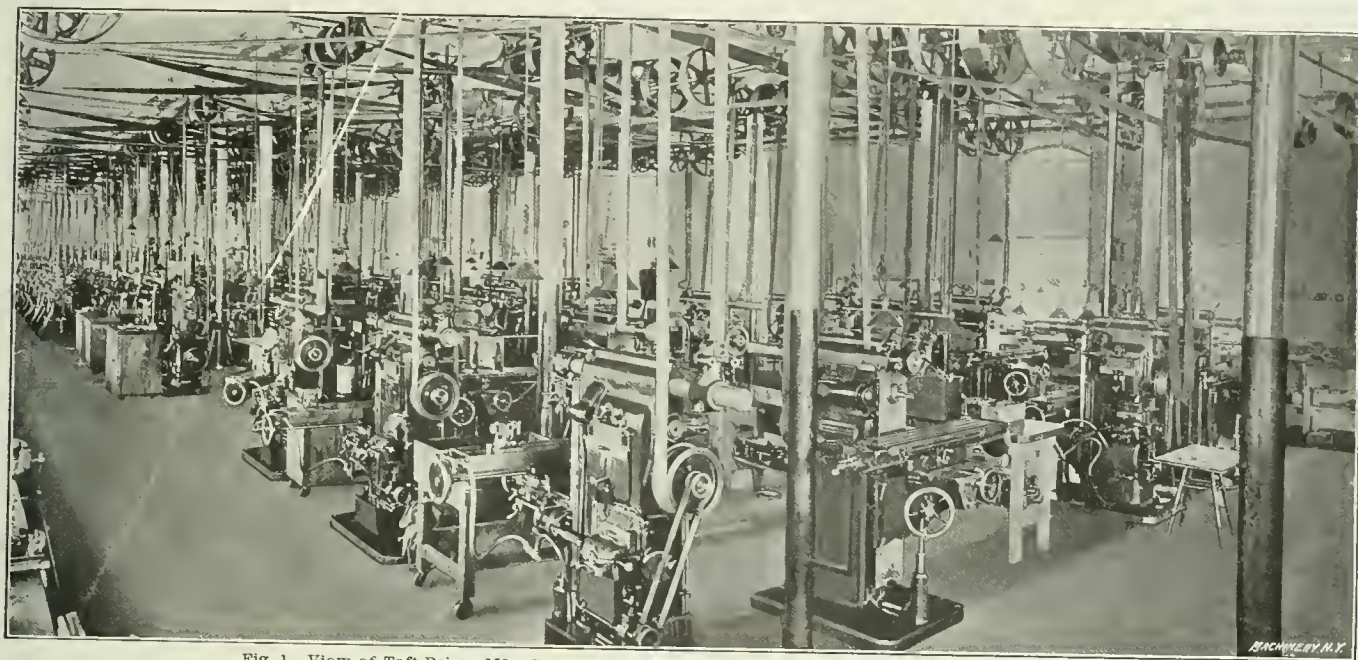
View of Taft-Peirce Mfg. Co.'s Tool-room, showing General Milling Division in the Foreground
